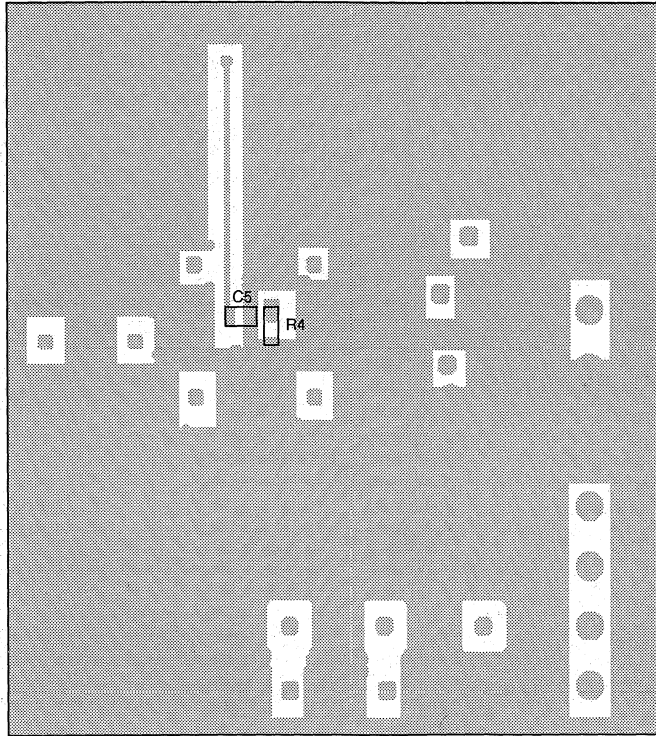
PCB top view with components for TQFP32; test circuit Fig.5.
